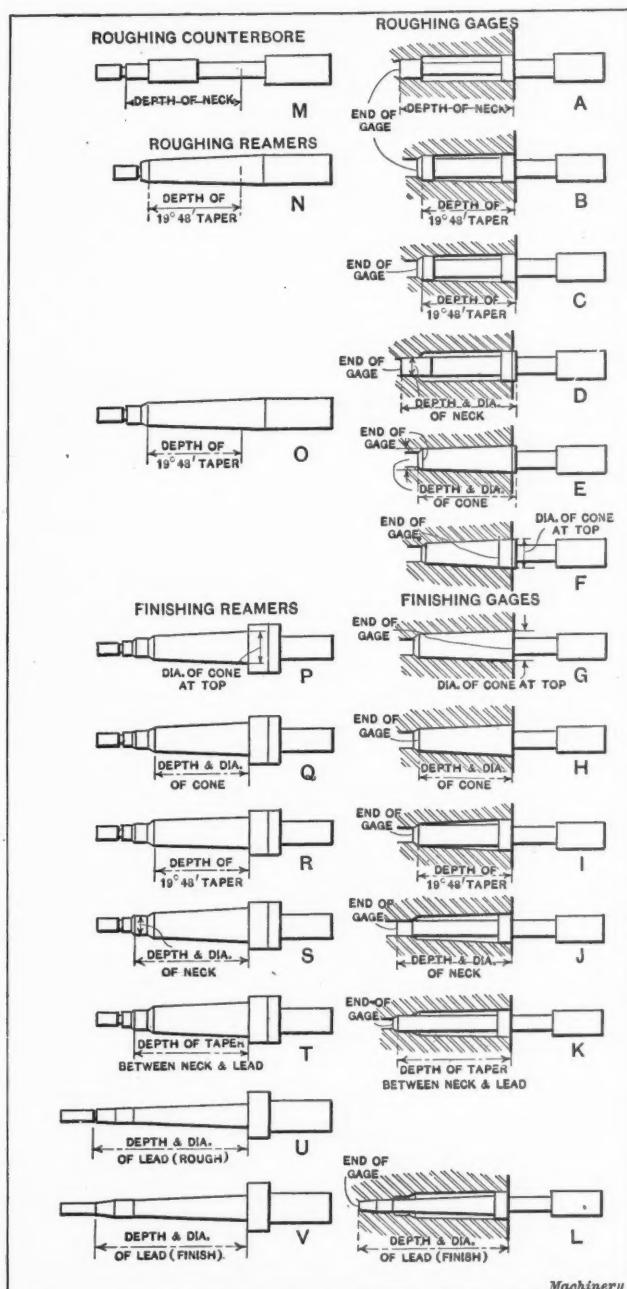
Tools and Gages used in machining Cartridge Chamber in Military Rifle Barrel, illustrating Another Method of Progressive Gaging
